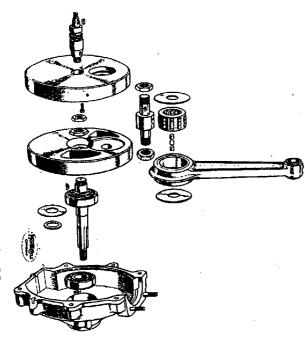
(a).—FLYWHEEL ASSEMBLY—1945/54 MODELS.
